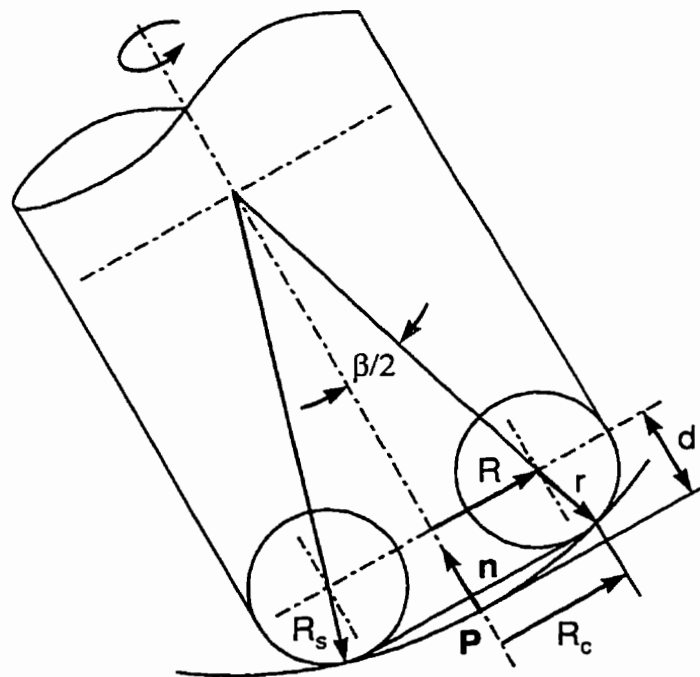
Multi-point tool positioning for a spherical cavity.
